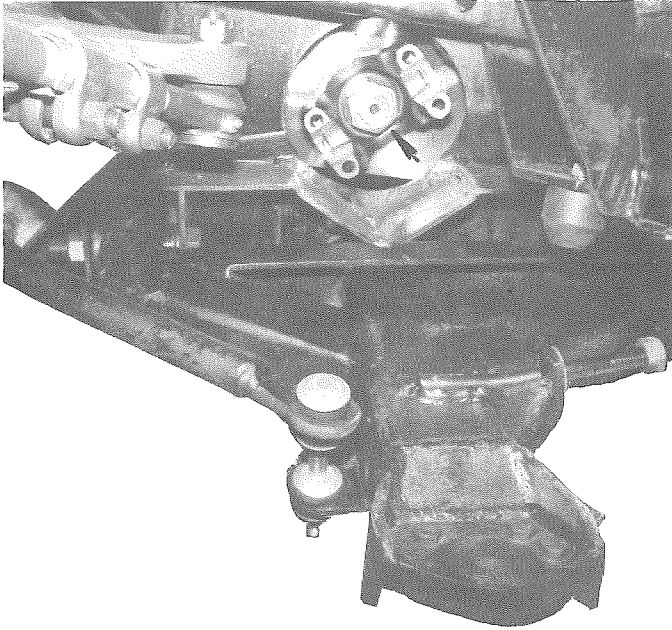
INNER YOKE REMOVAL – Remove 1 11/16” retaining nut that secures the inner yoke. Remove the inner yoke by using a claw puller.
